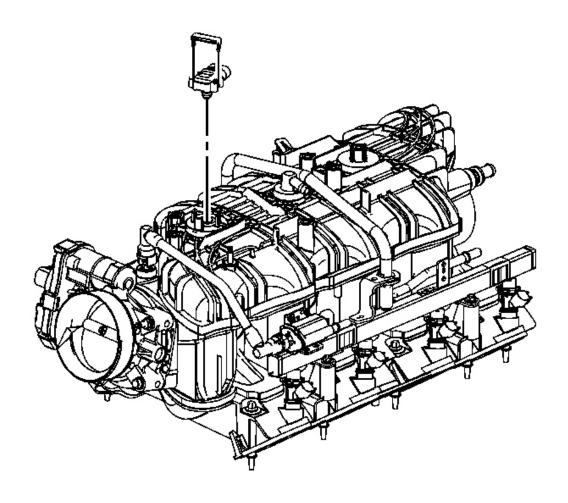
Manifold Absolute Pressure (MAP) Sensor Retainer Courtesy of GENERAL MOTORS CORP.
